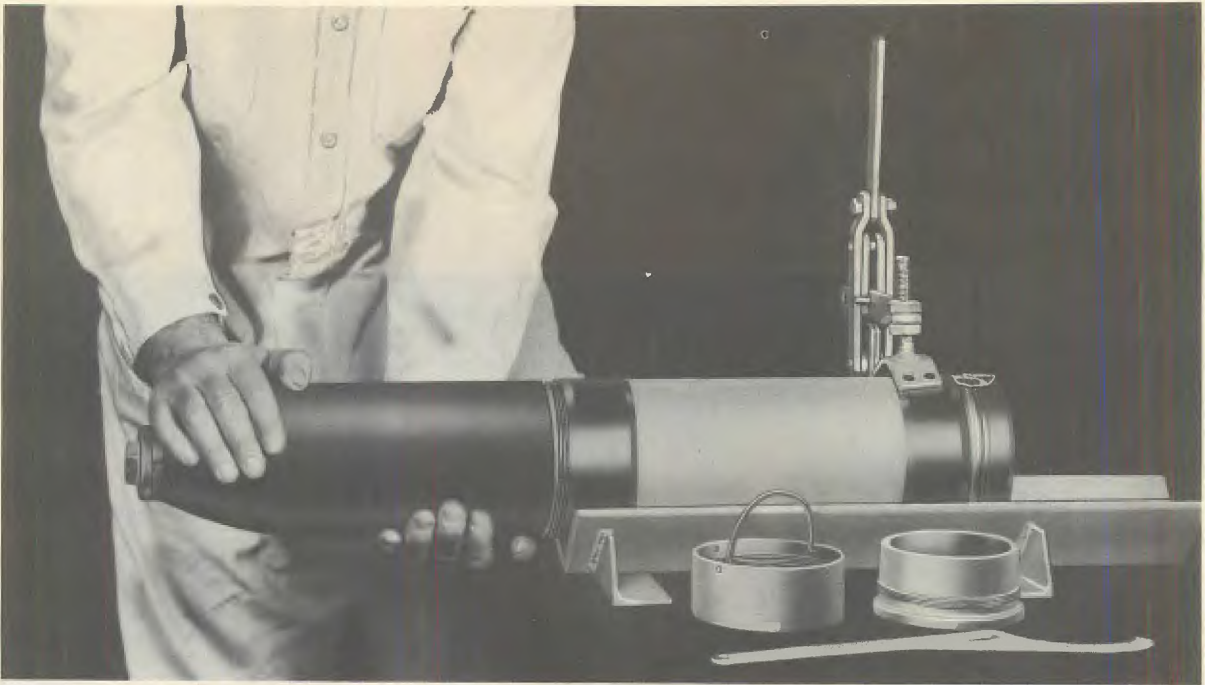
Use of Assembly Kit Mk 2 Mod 0 in Threading of 5.0-Inch Head to Motor by Hand.
